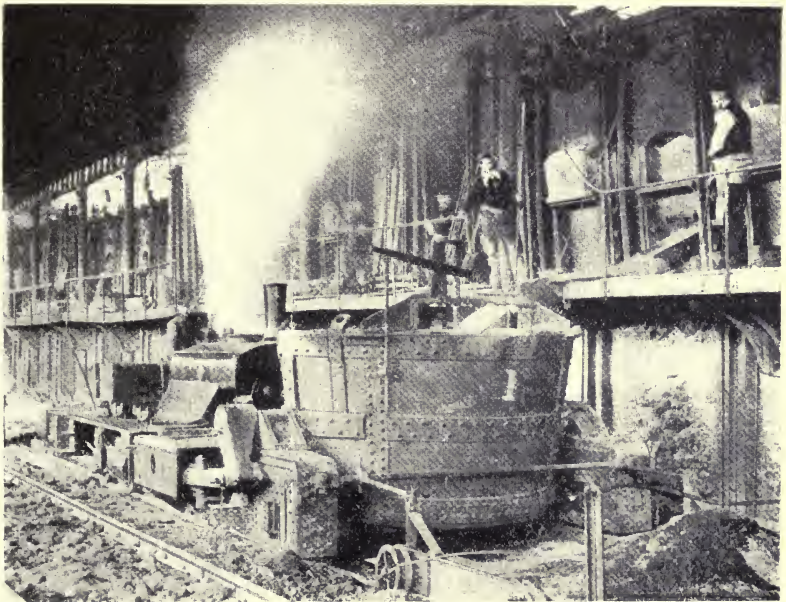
Casting Side of Furnaces. (Dalzell Works.)
